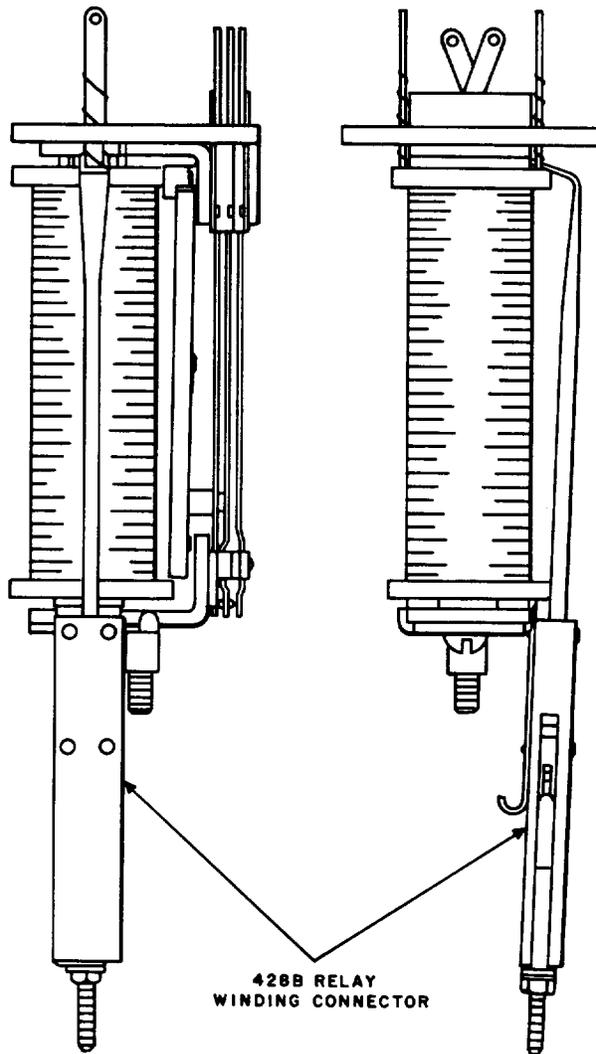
Connecting to Winding Terminal of a 149-Type Relay
